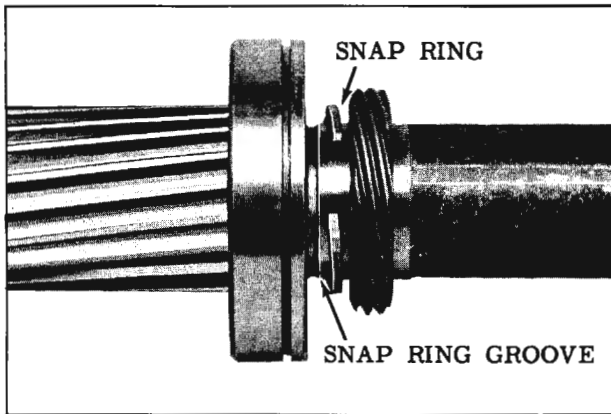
Snap Ring Position Prior to Disassembly of Main Shaft
